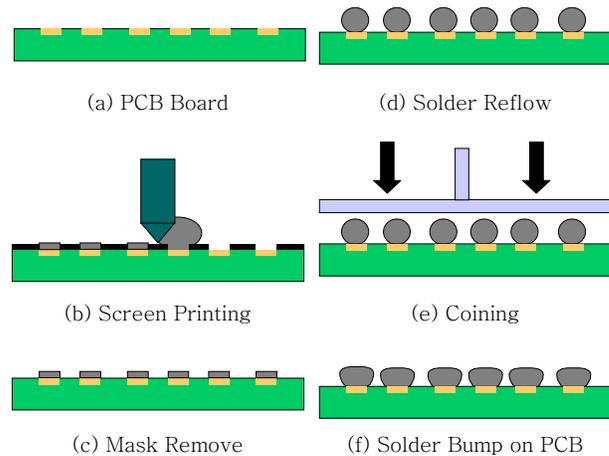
Manufacturing process for producing coined solder bump on PCBs.
